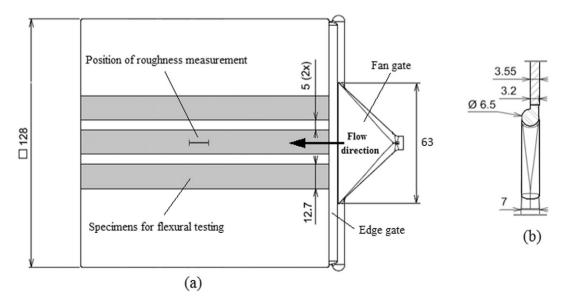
(a) Molded plate and arrangement for machining the specimens; (b) cross-section of the injection channel.
